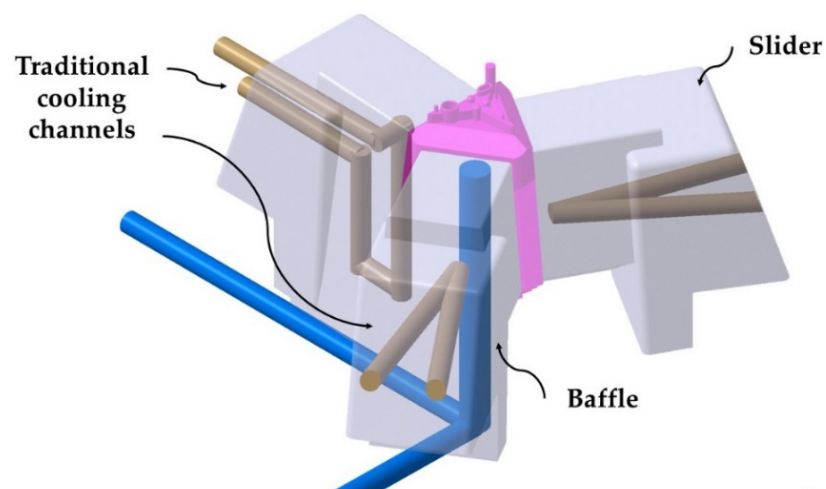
Current layout of the traditional cooling of the core and sliders of the mold.
